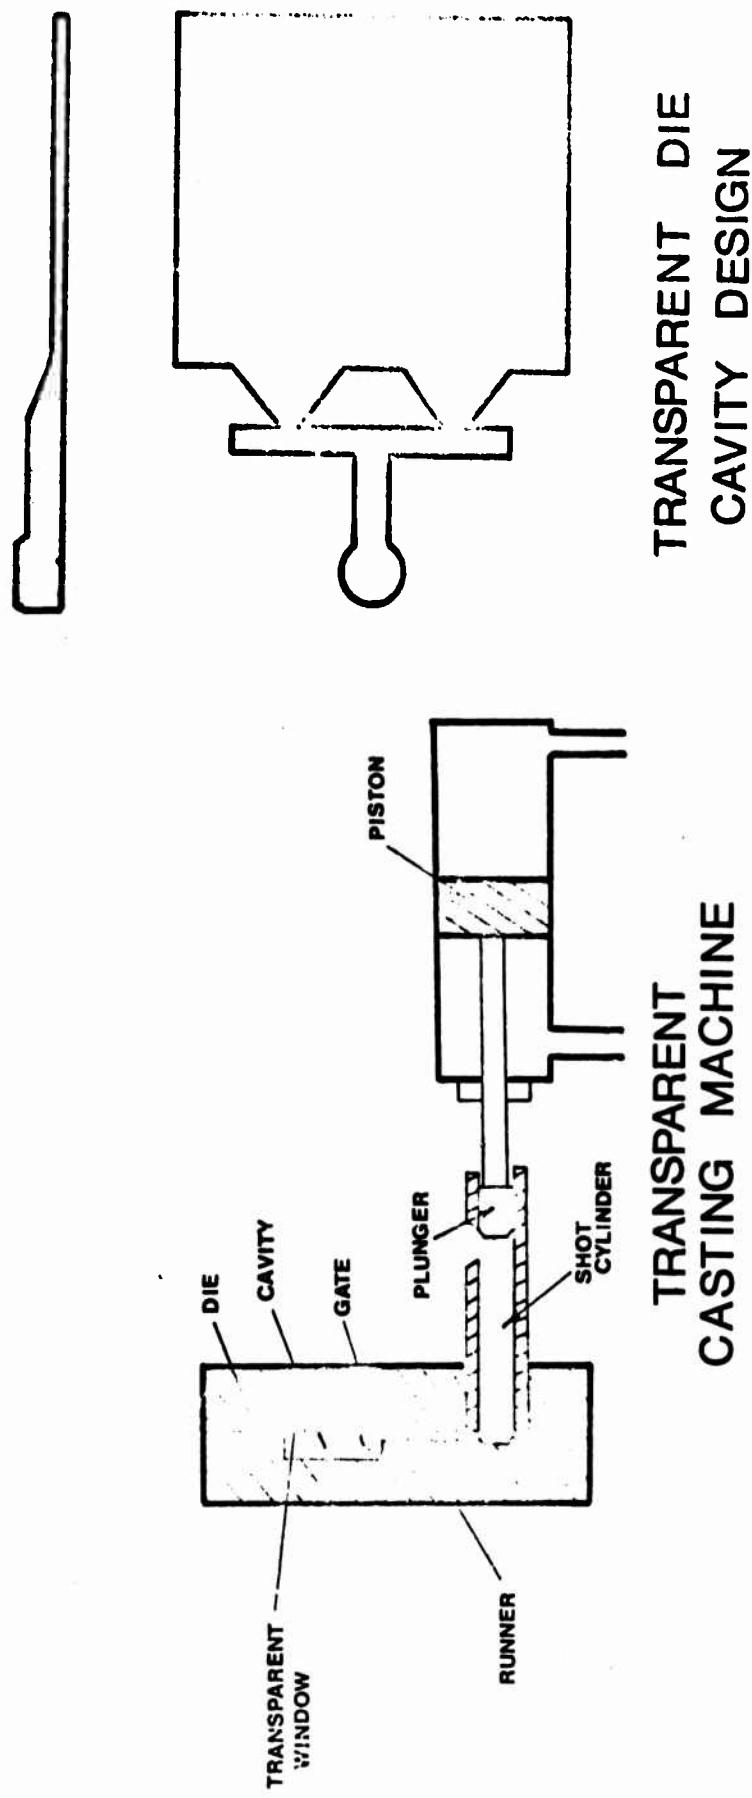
Schematic diagrams of the transparent casting machine. Left: overall view showing die and injection assembly. Right: view showing cavity design
